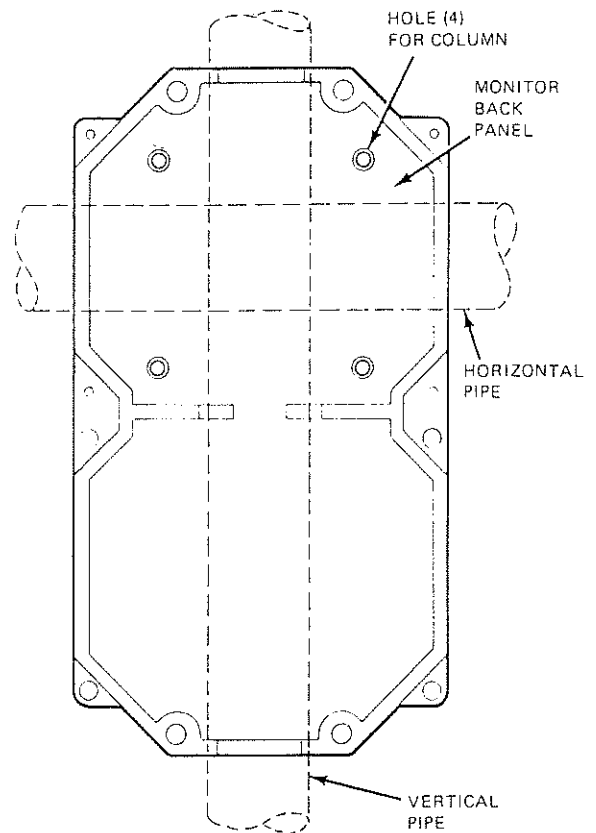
Back Panel of Monitor with Mounting Holes Shown for Pipe Mounting
